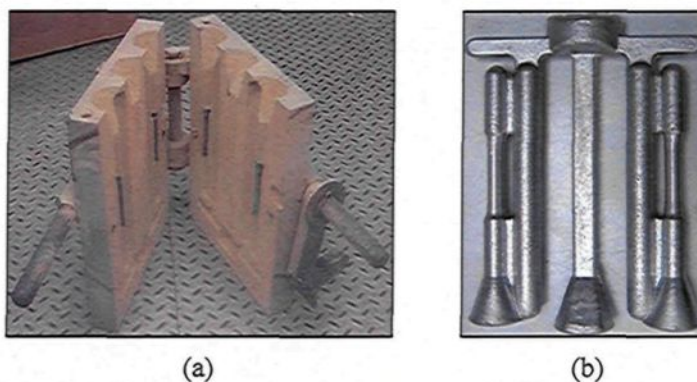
(a) ASTM B-108 permanent mold; and (b) corresponding tensile test bar casting.
